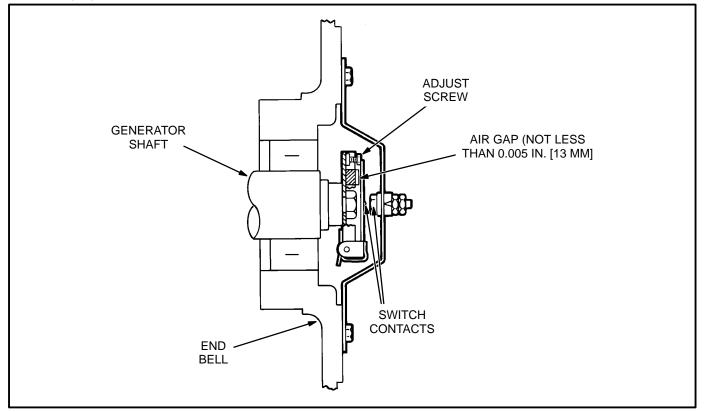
OVERSPEED SWITCH ASSEMBLY
